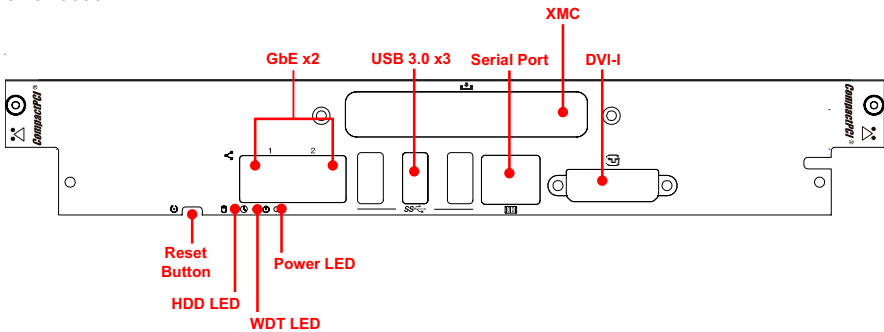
cPCI-6636D/DZ Assembly Layout
